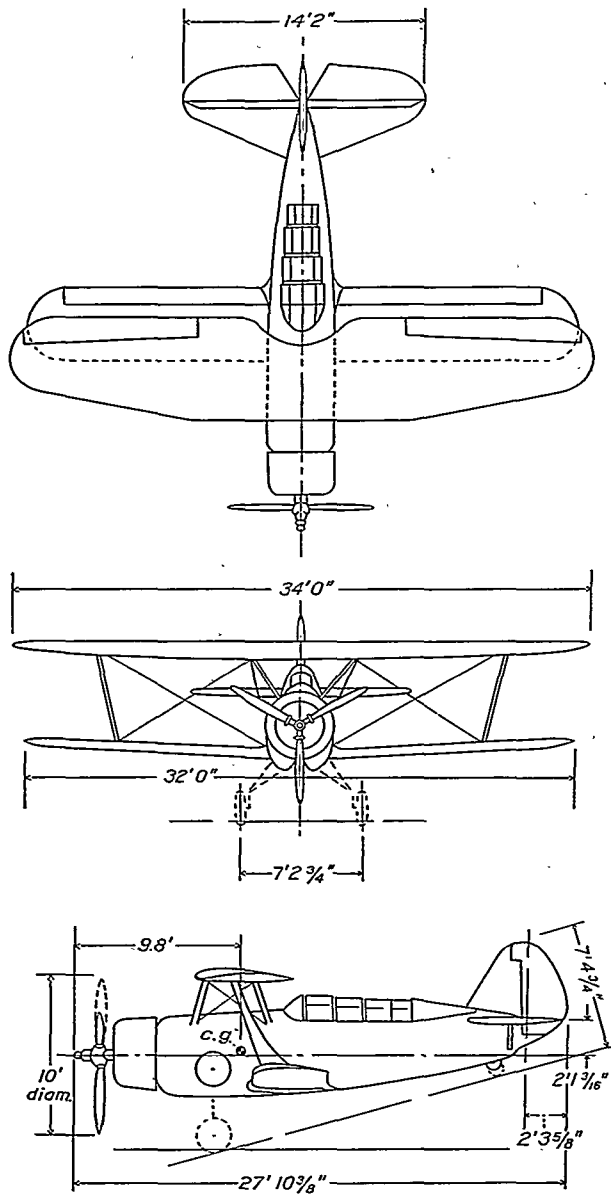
Three-view drawing of the XSBC-3 airplane. Areas, in square feet: wing, 317; horizontal tail, 57.8; gross elevator, 29.4; elevator back of hinge, 23.4.
